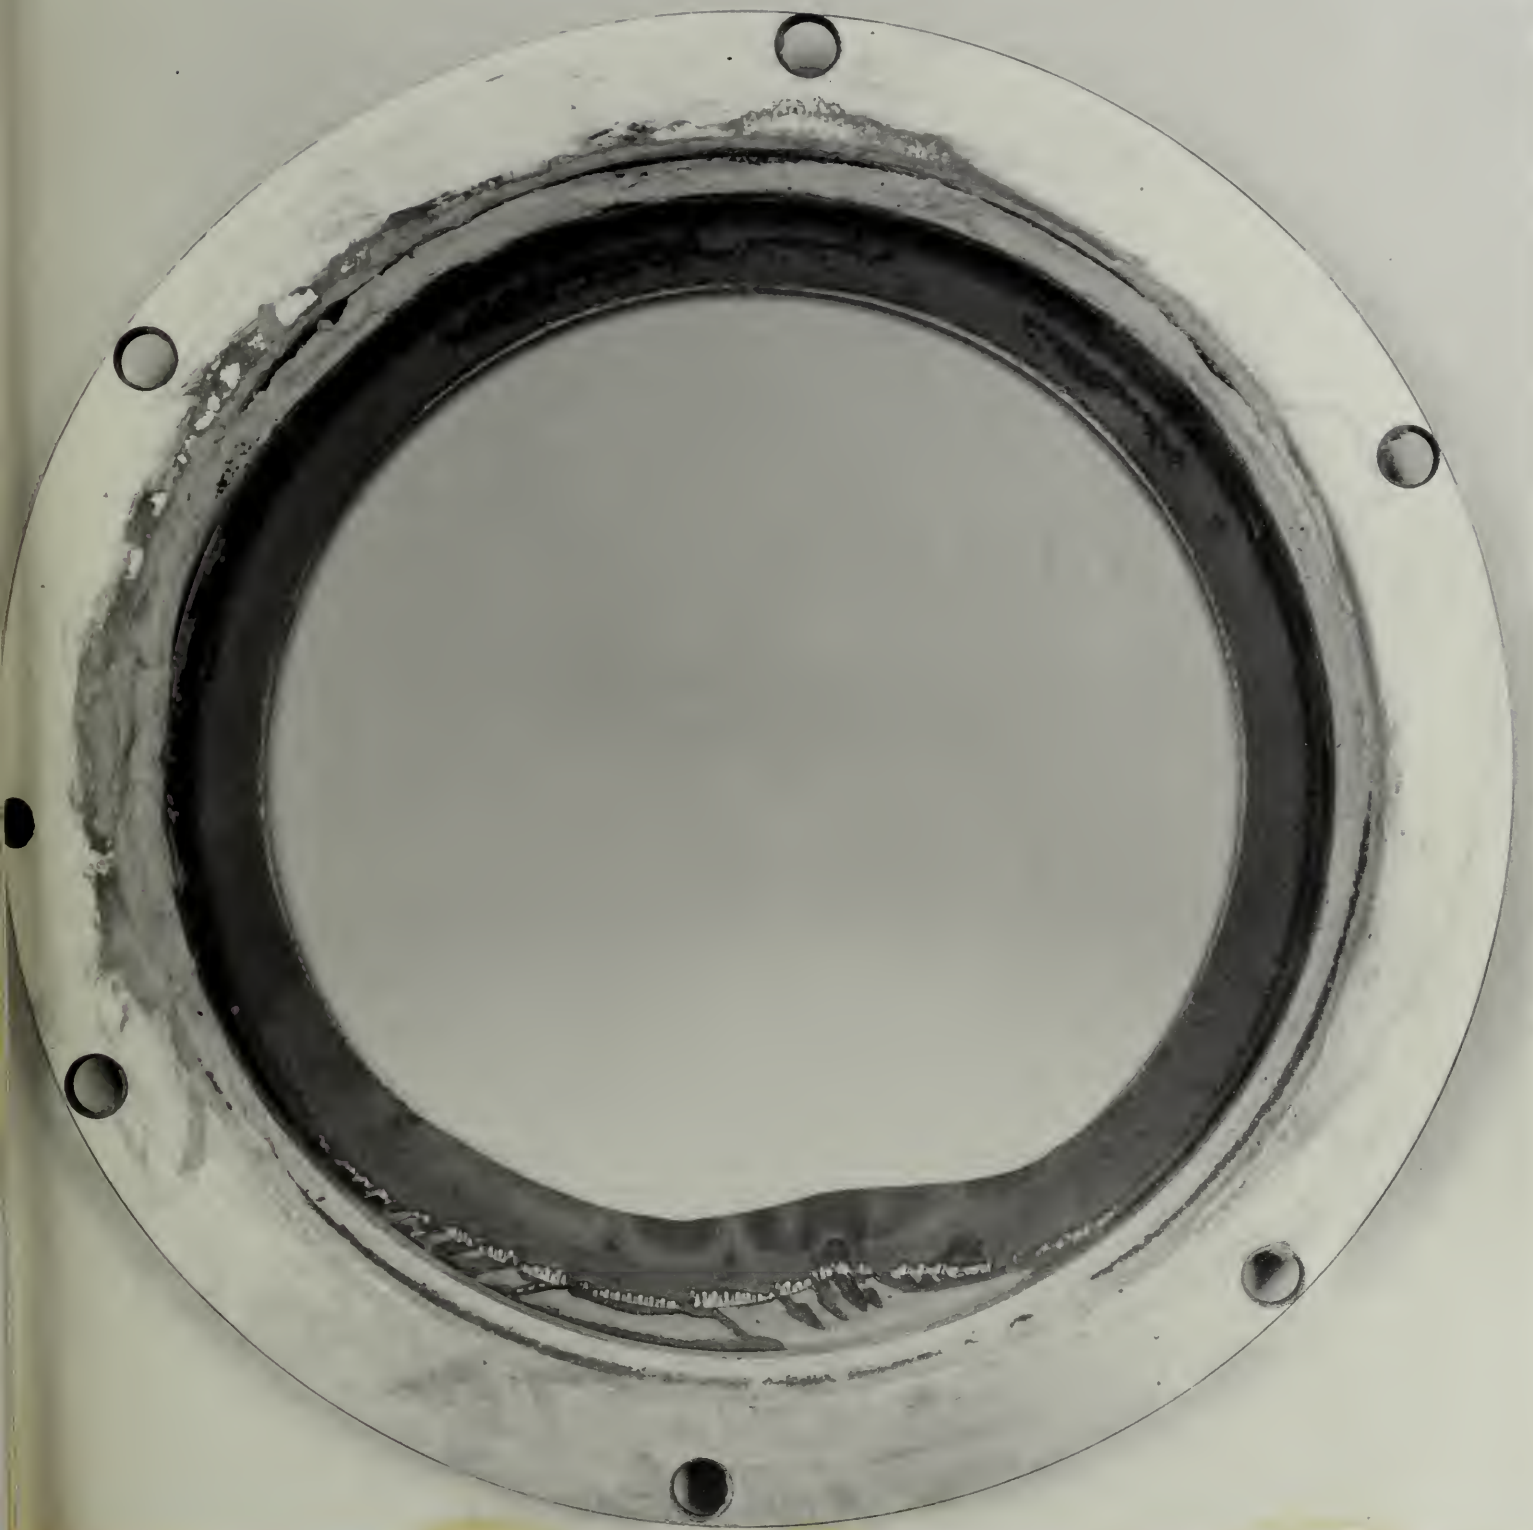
The glass plate and mounting ring assembly after test 4. The bottom gasket extruded toward the center of the glass plate after sustaining a maximum load of 25,500 lb.
